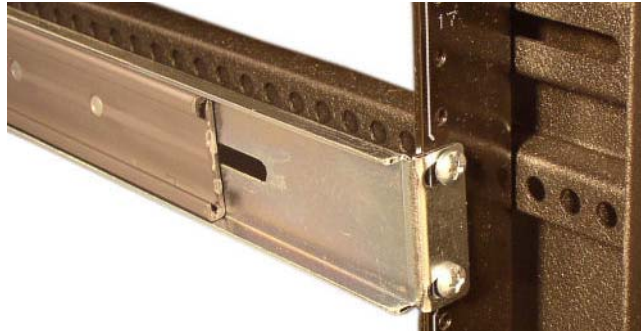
49. Installed Slide Rail in a Tapped-Hole Rack - Rear Mount Point
